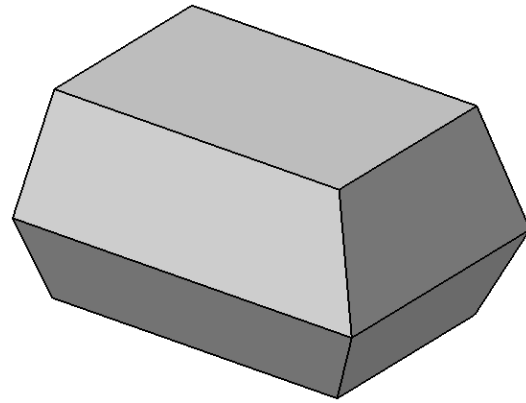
Faces drafted with the Draft both sides check box selected
